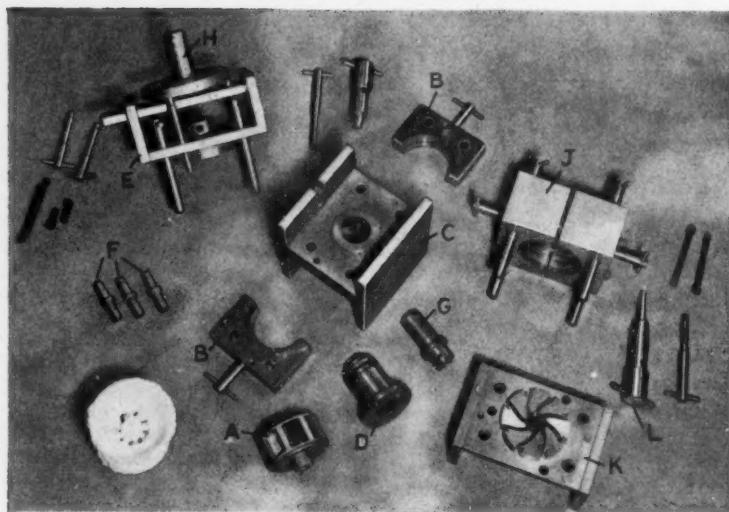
A mould for producing a frozen mercury pattern of the rotor breather seen at A is here shown dismantled
